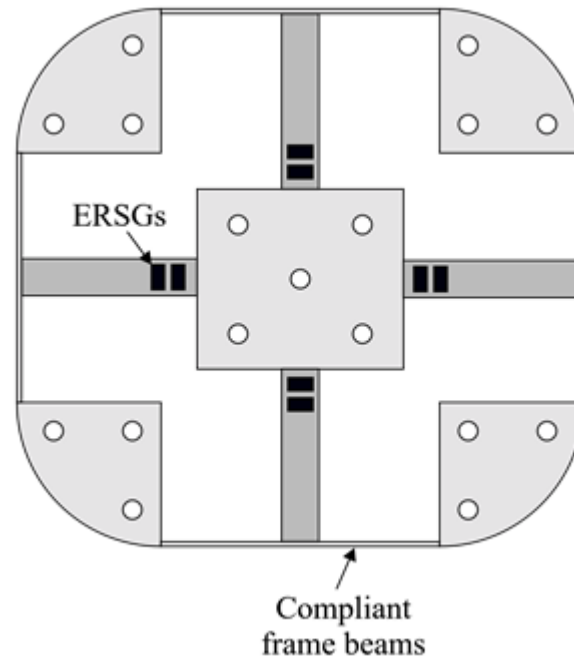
Illustration of a flexible-jointed six DOF cross-beam design documented in [37], showing highly-compliant plate elements in the outer frame and ERSG locations on the beam members
